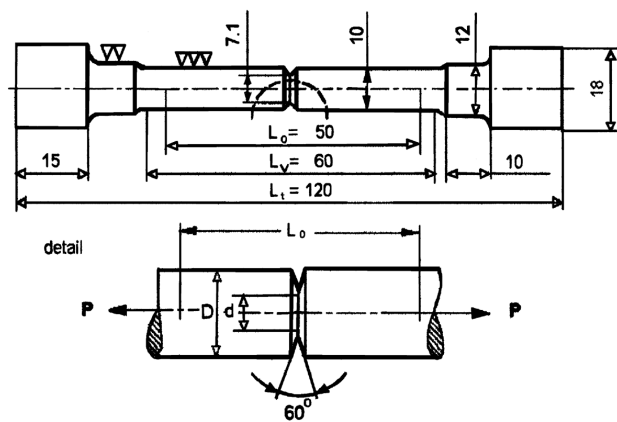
Circumferentially notched and fatigue-precracked K_{Ic} -test specimen. All dimensions are in mm.
